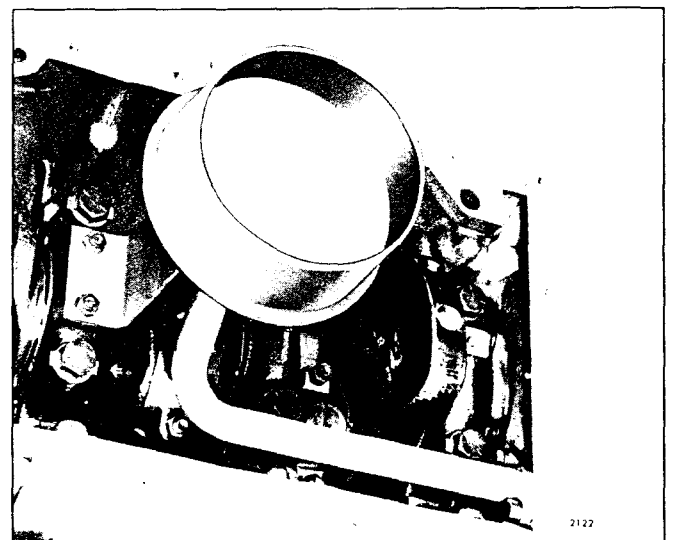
Typical Oil Pump Inlet Pipe and Screen Mounting
